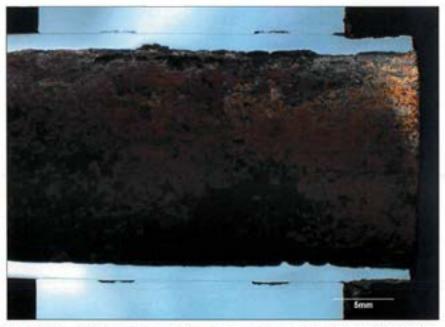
Cross section of typical tube – tubesheet interface. Two grooves are present at each joint.
